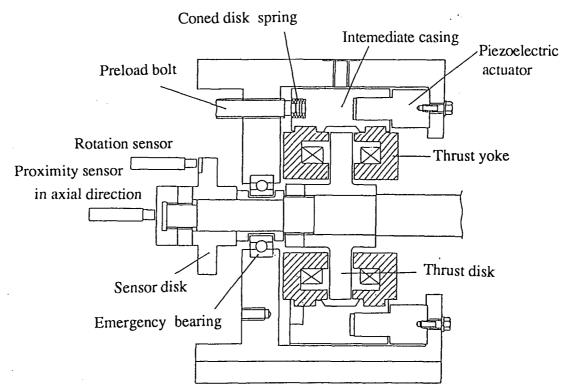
Sectional view of the thrust bearing with piezoelectric actuators
